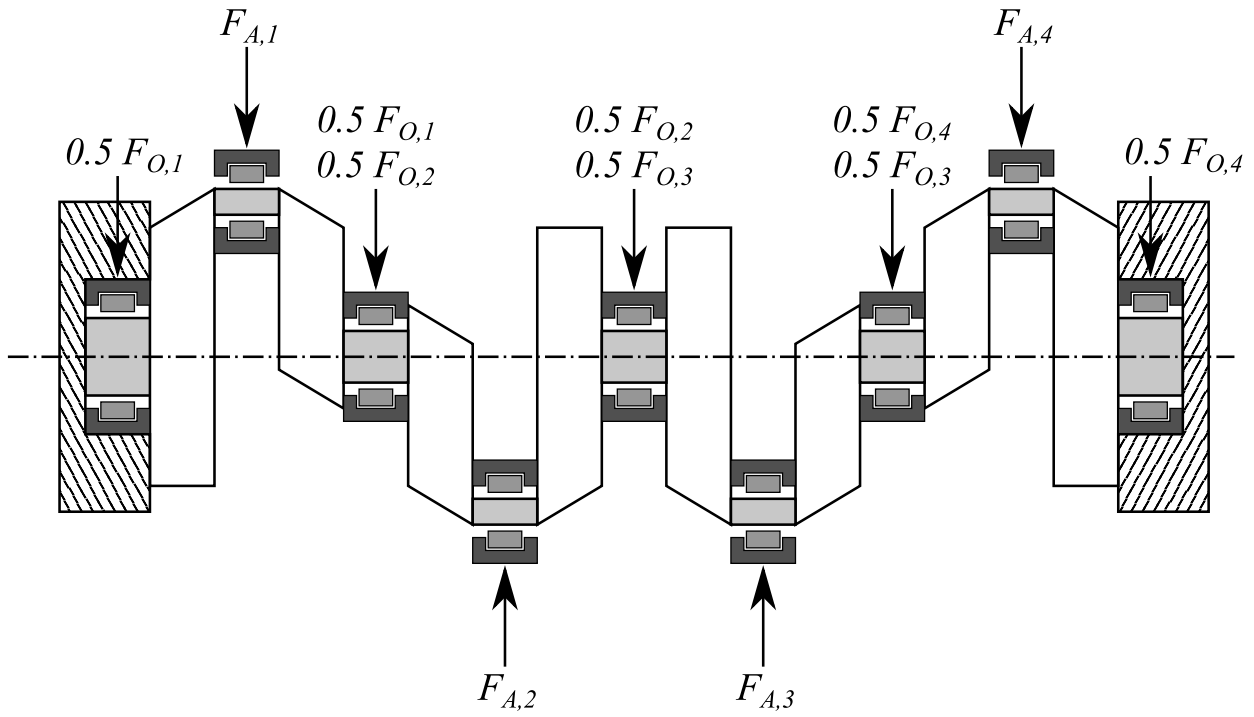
Scheme of loads applied on the bearings in a 4-cylinder engine
